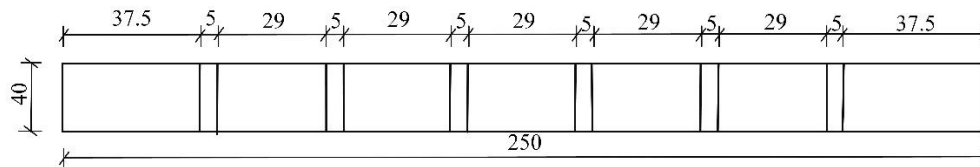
Inner grooved anchor fastener plan view (Unit: mm)
